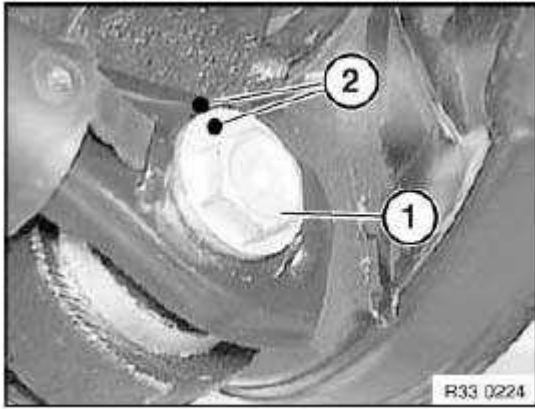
Mark Position Of Eccentric Screw To Lower Control Arm With Centre Marks
